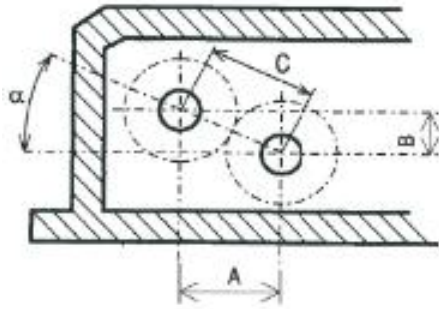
Axial distance for housing the gears in the gearbox housing.
